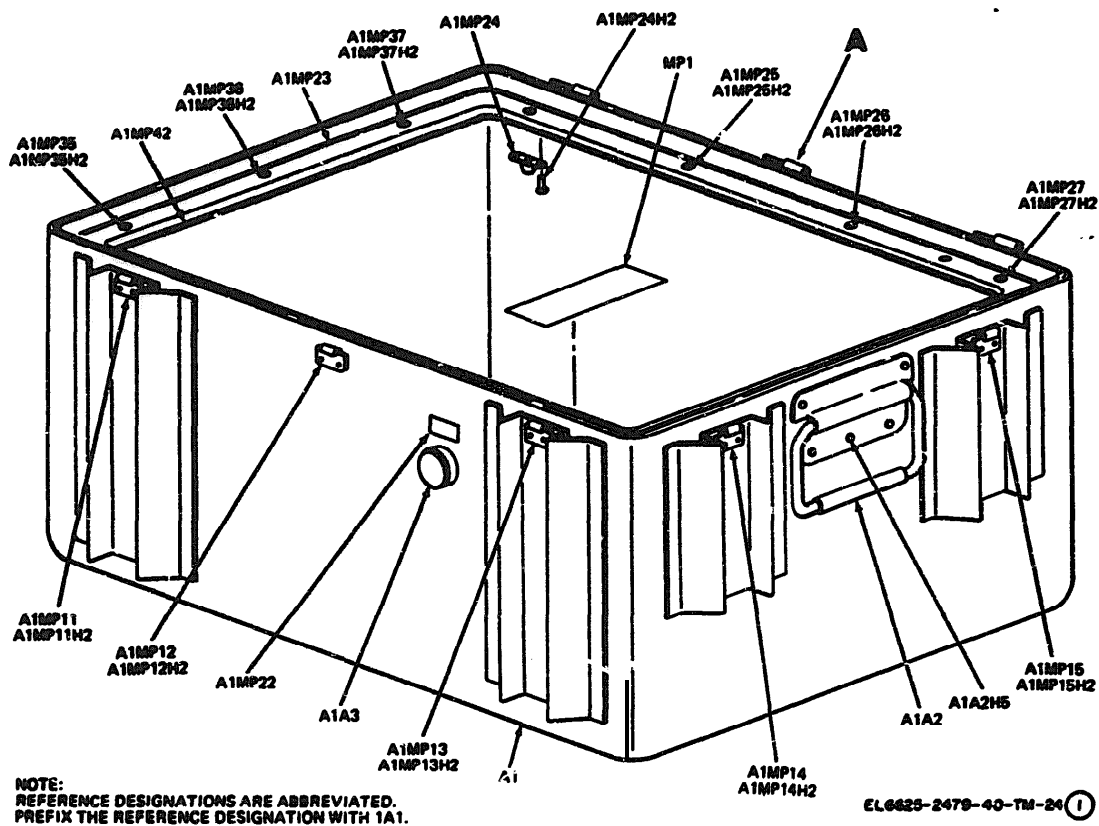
Case assembly 1A1, parts location (part 1 of 2).
